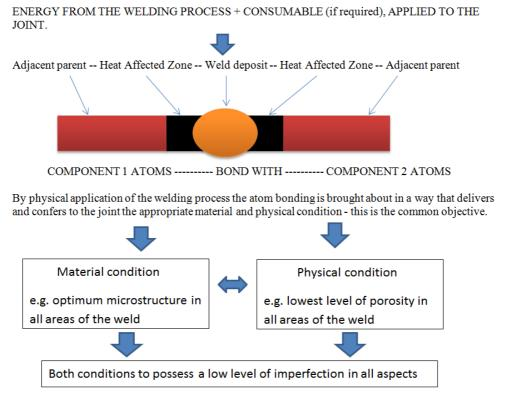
Areas of a fusion welded joint and the "Common Objective" of welding action.
